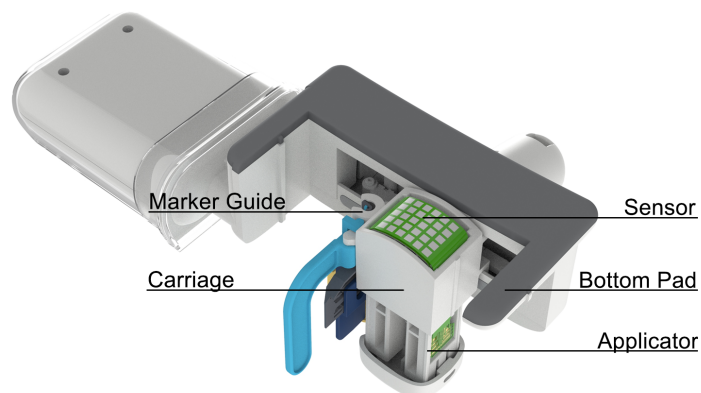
Bottom view of assembled VerTouch, highlighting sensor mounting.
